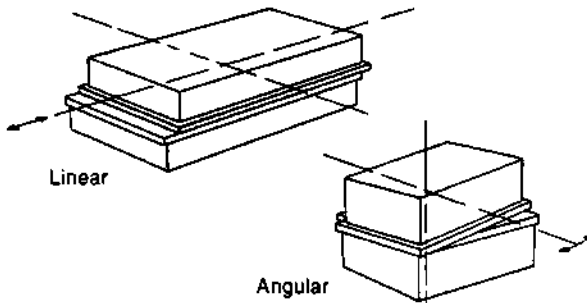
L3 The movement of parts undergoing vibration welding can be either linear or angular. (from Bralla, *Design for Manufacturability Handbook*.)
